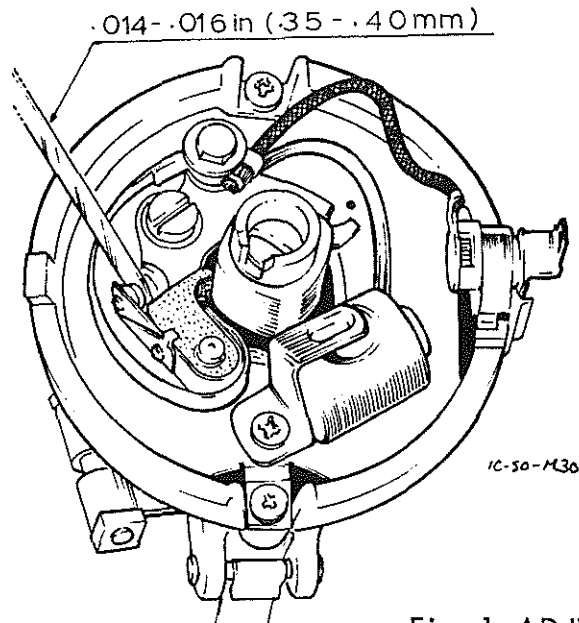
ADJUSTING CONTACT BREAKER POINT GAP
